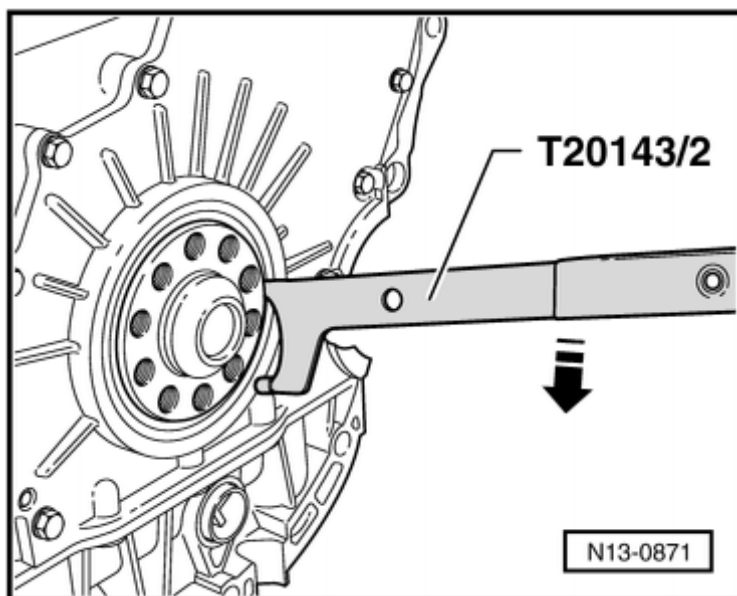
Identifying Removal Hook T20143/2 Placed Behind Sealing Lip Of Oil Seal
